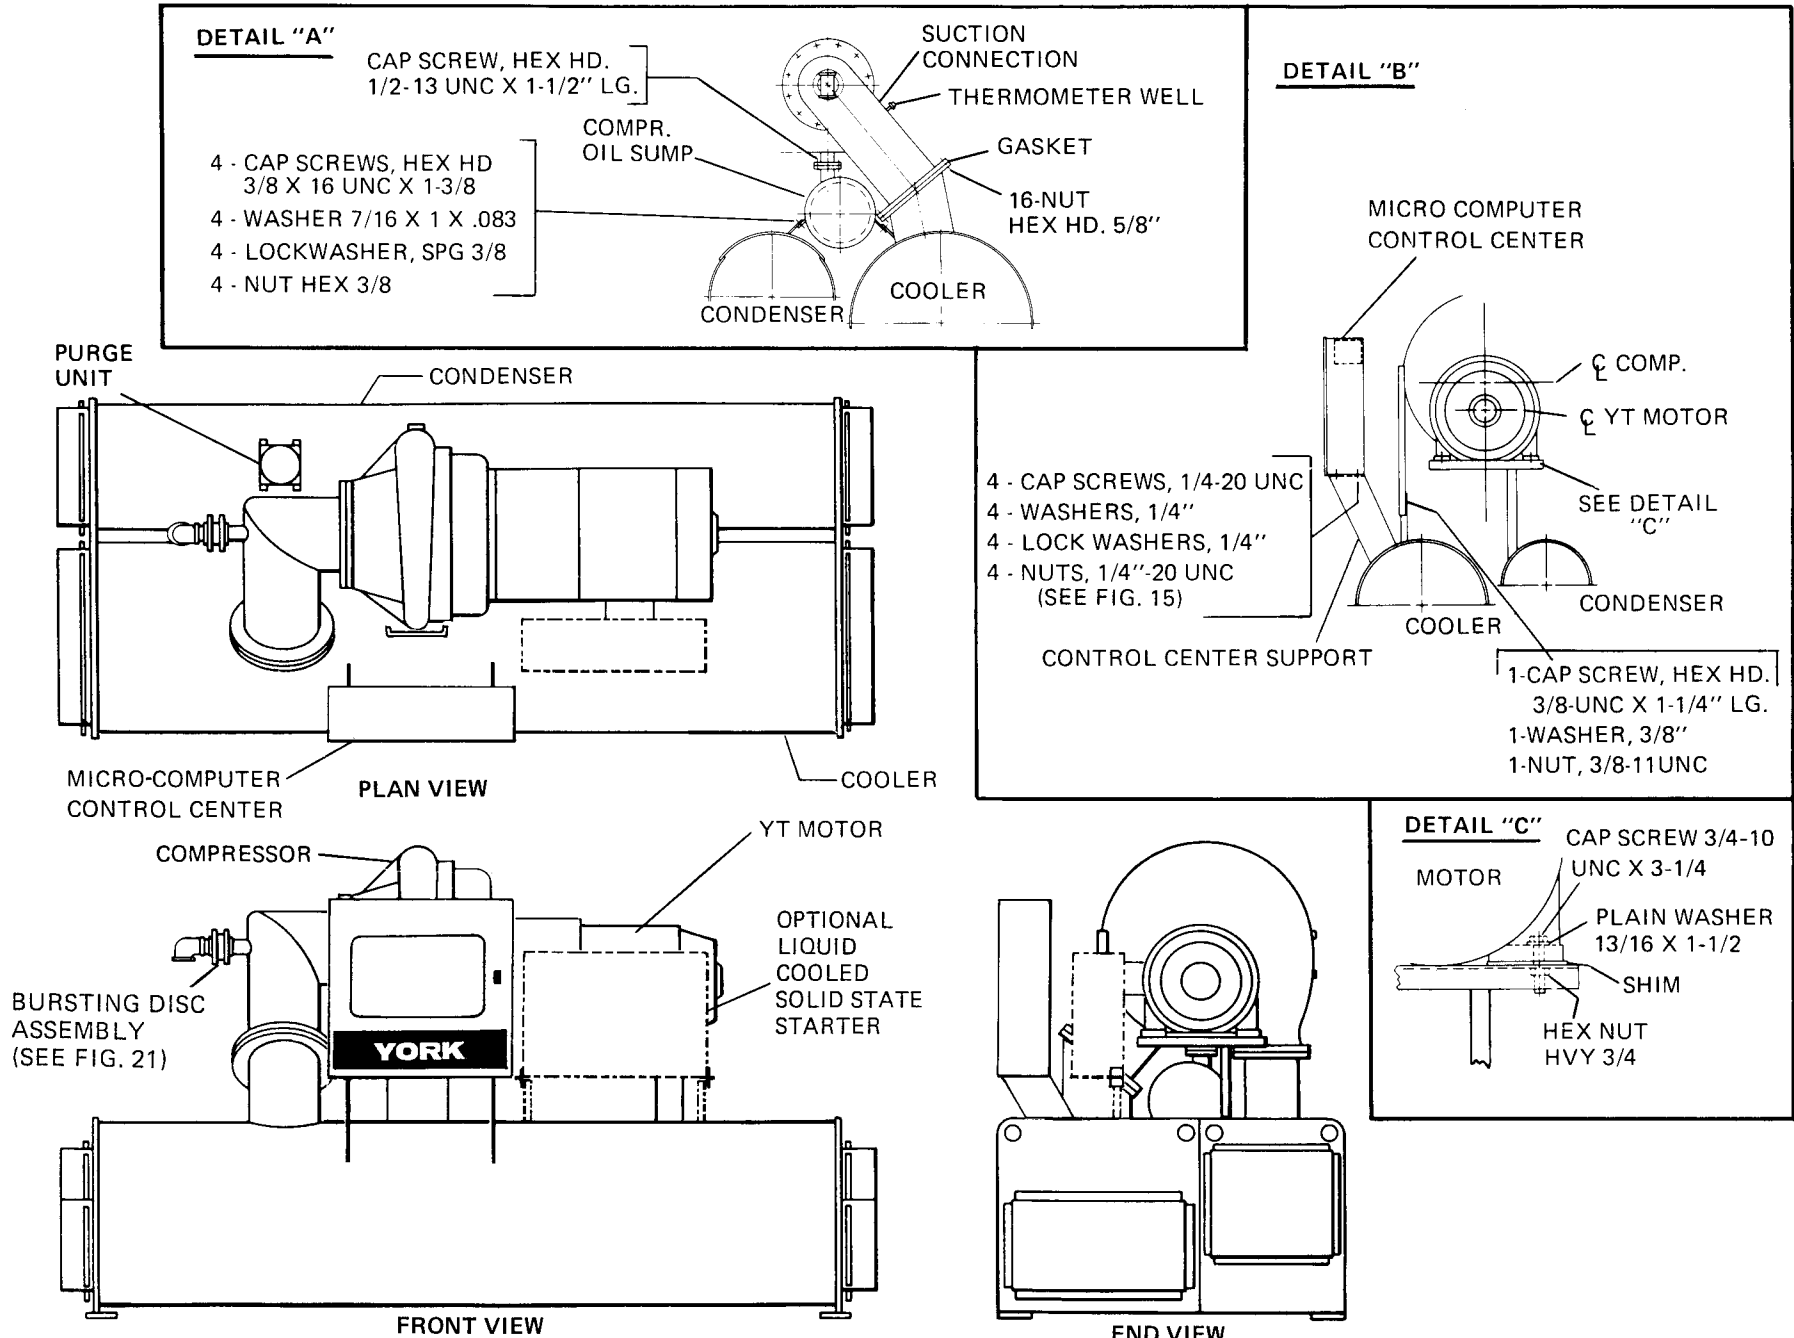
FIELD ASSEMBLY MODEL YT CODEPAK (YT A1 A1 B1 THRU F3 S3 C2)
